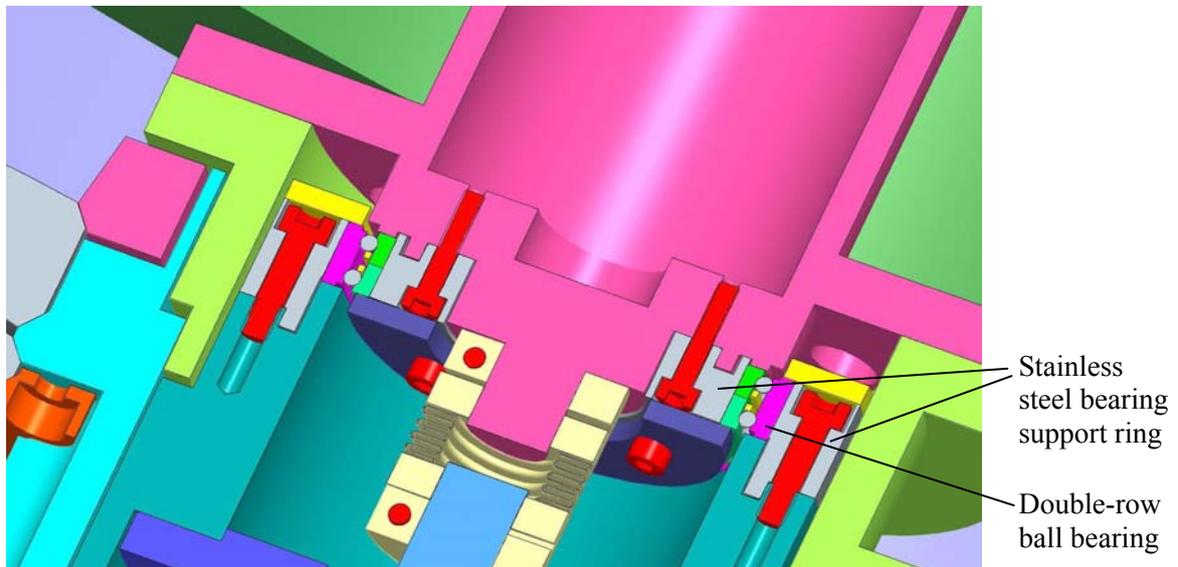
Optics wheel ball bearing (detail view of Figure 3.3.2-7)
